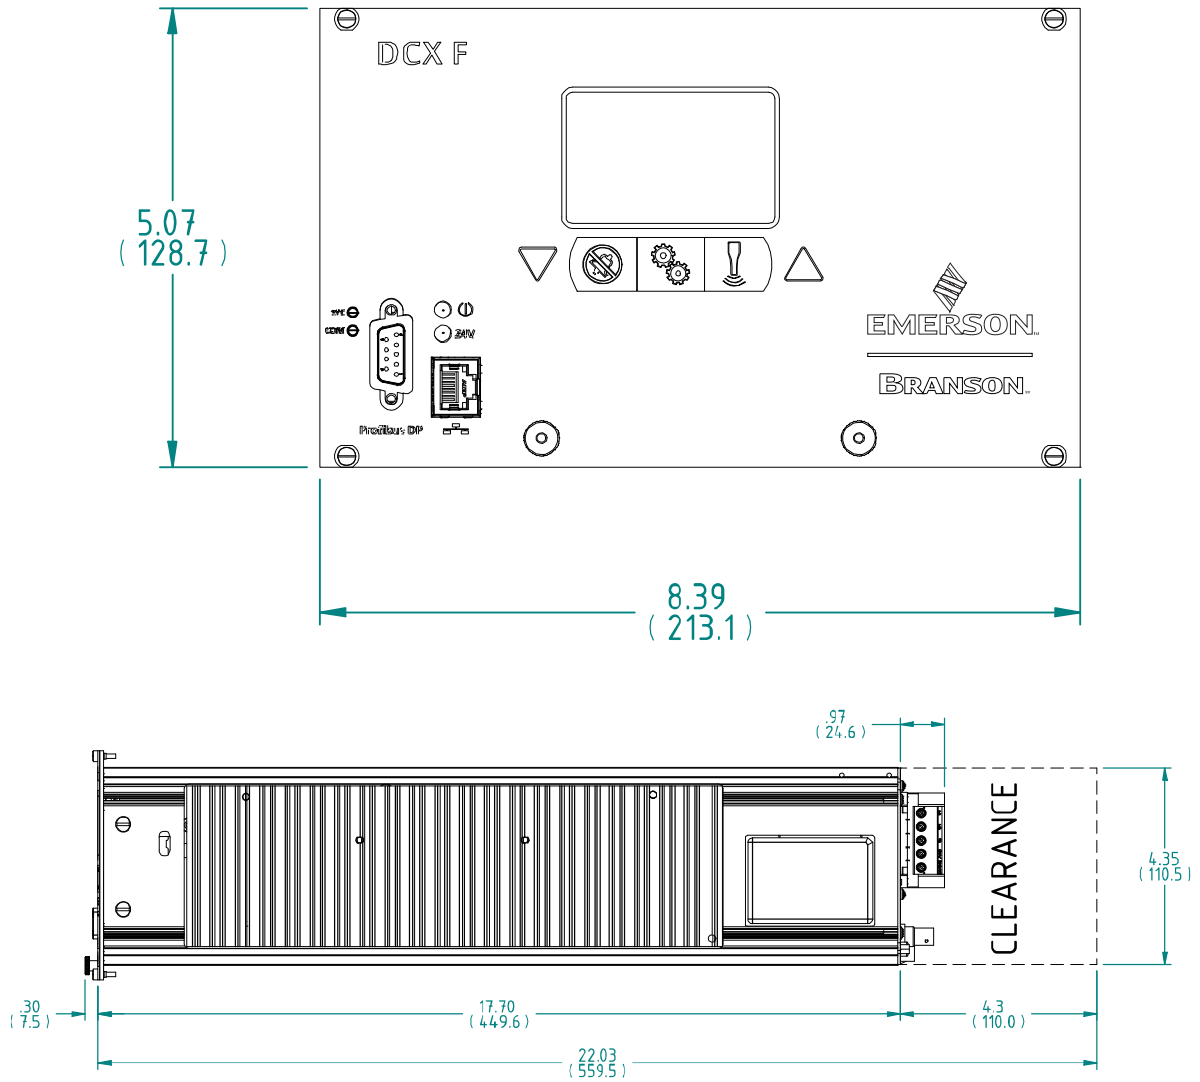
DCX F-DP Power Supply Dimensional Drawing (Large)
